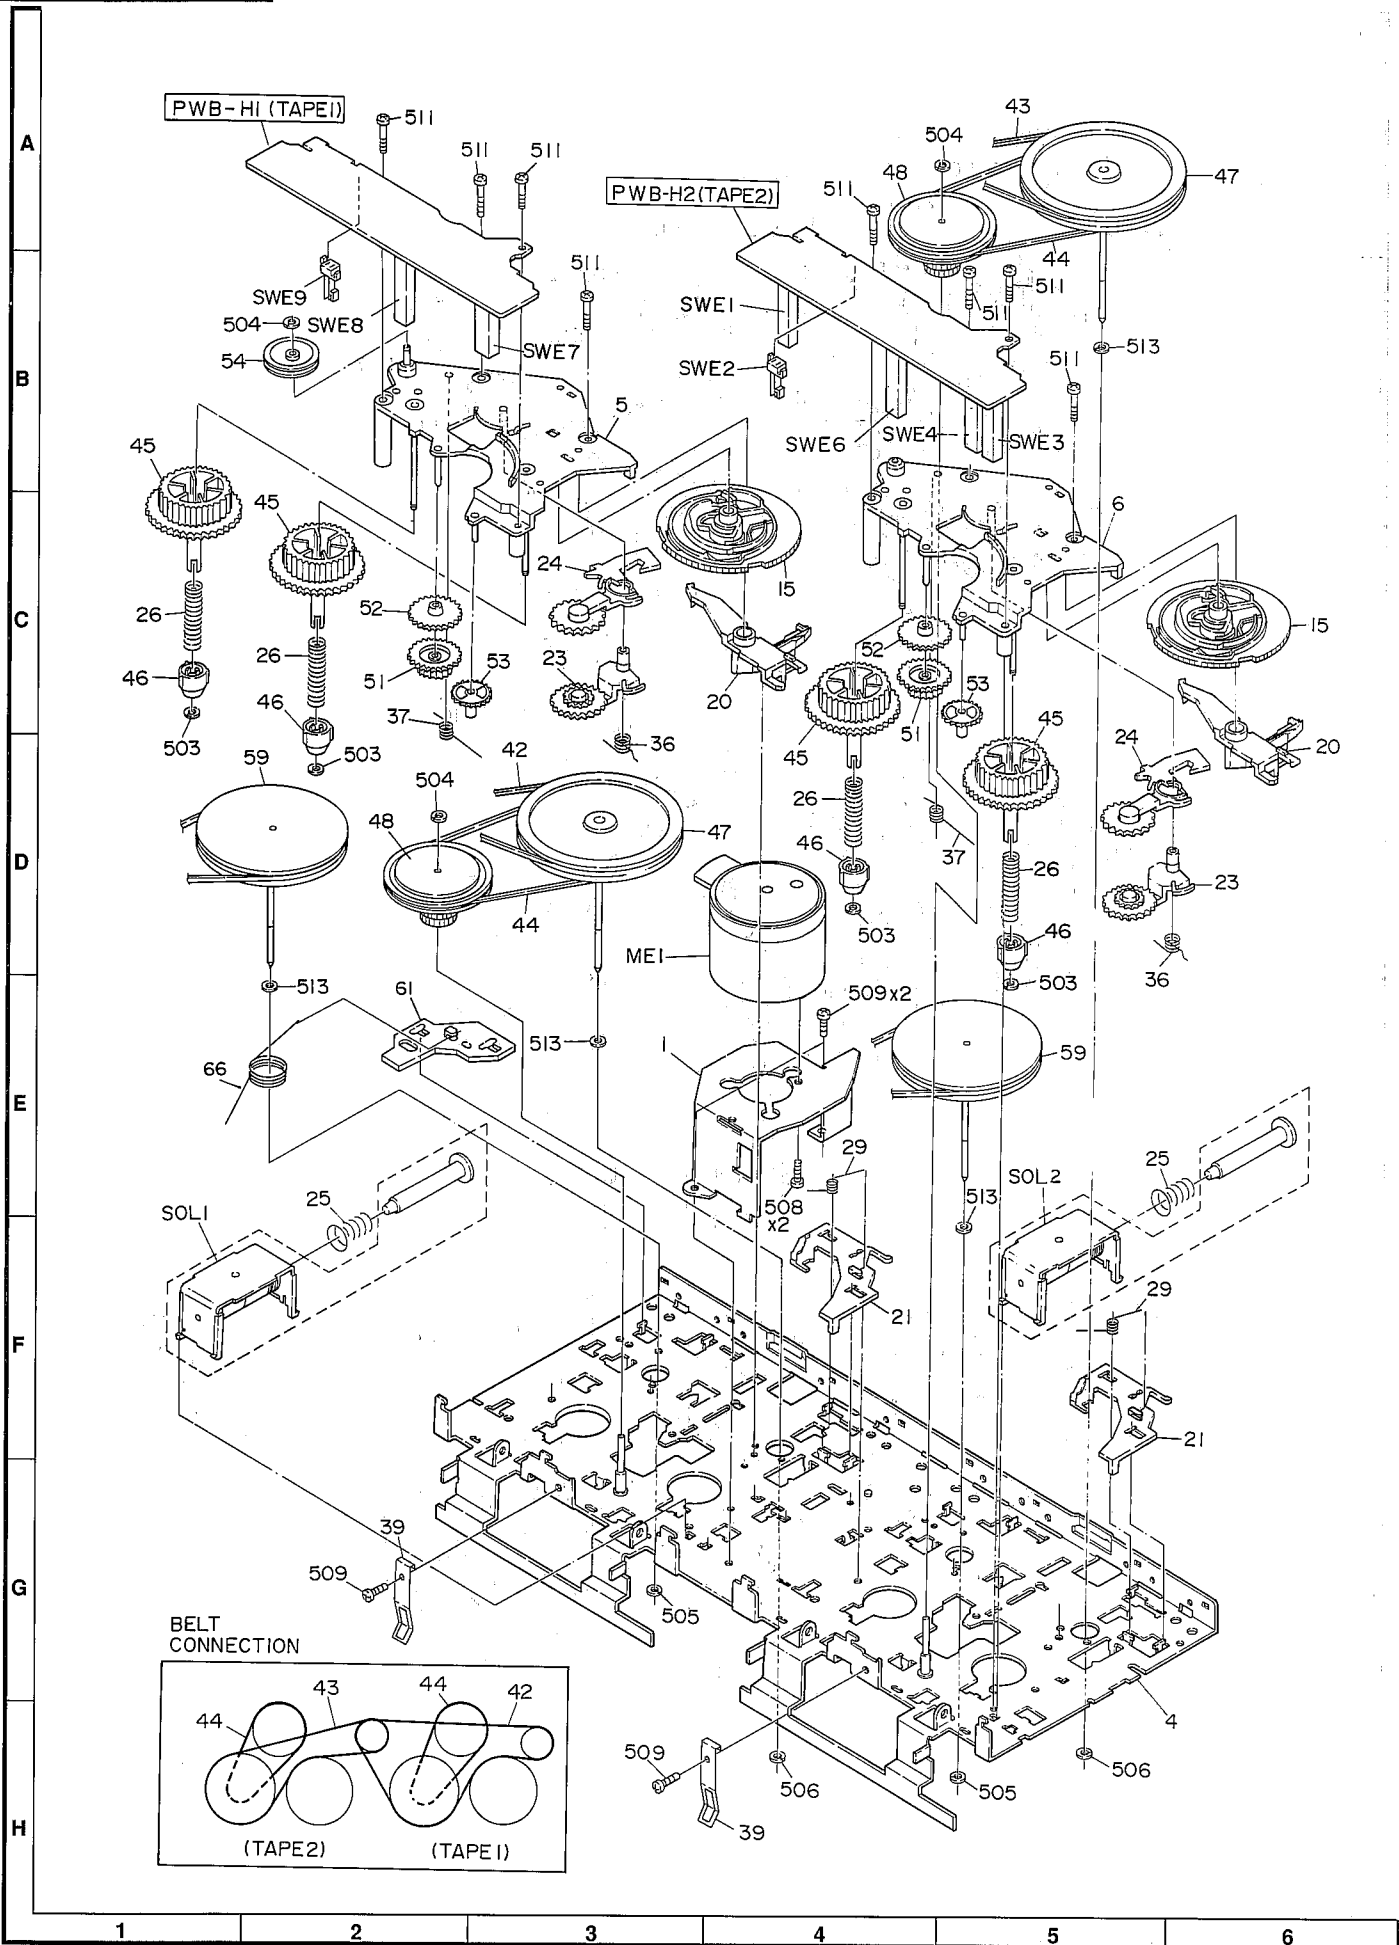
TAPE MECHANISM EXPLODED VIEW(2/2)
